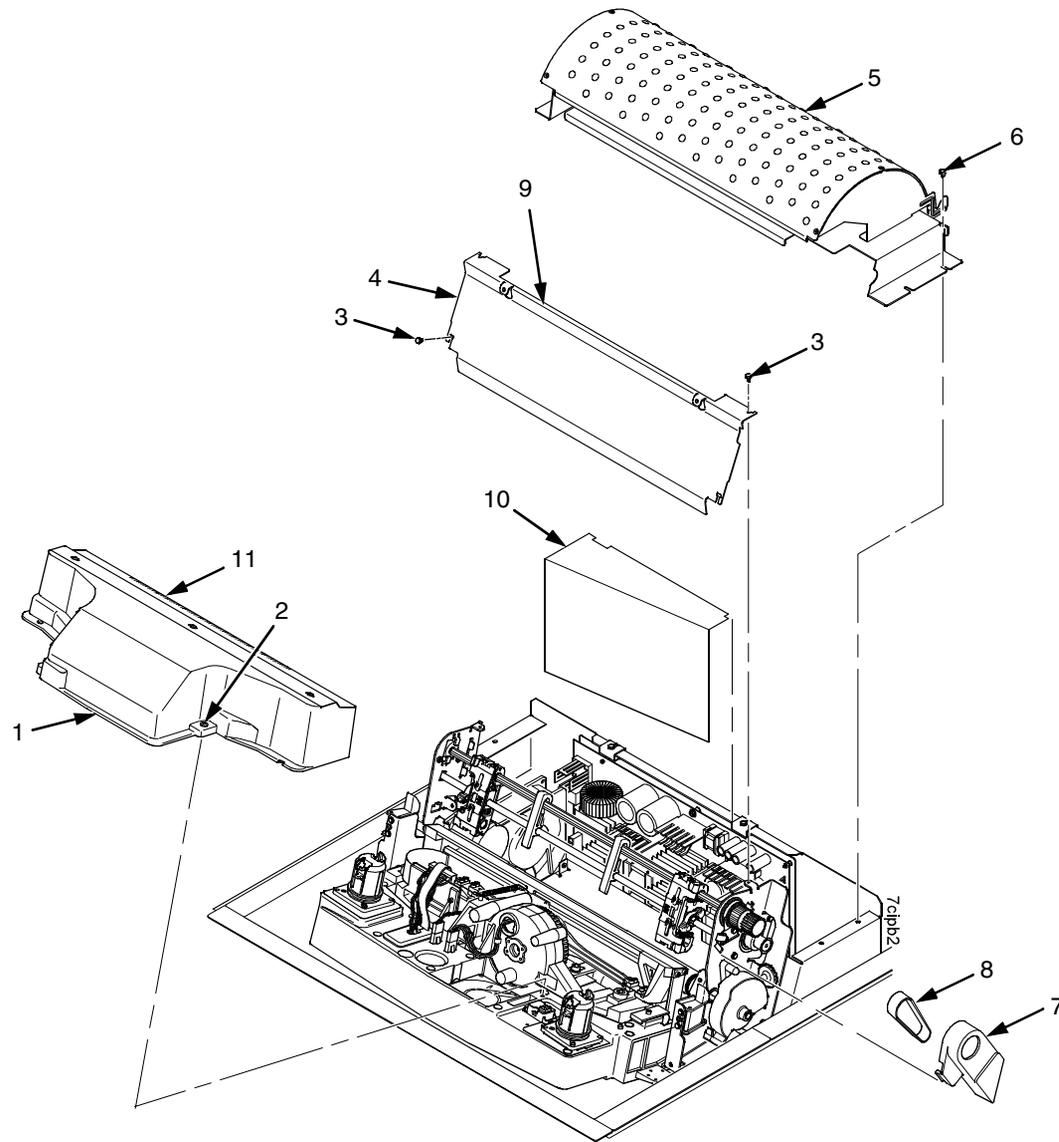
This illustrated parts breakdown shows the inside covers and card cage of a cabinet model.
